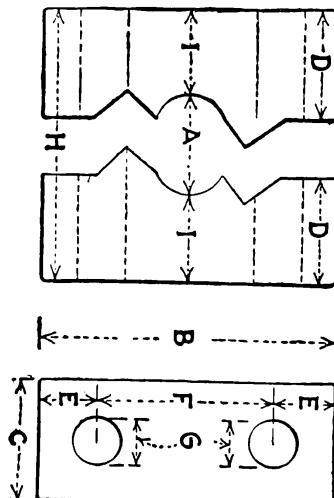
E.—Showing cleats the dimensions of which are given in Table 16I.
